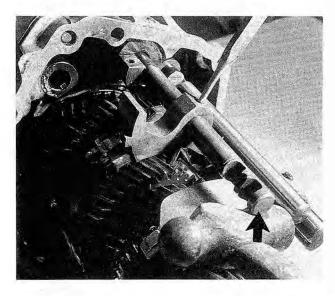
Selector shaft operating lever rolled pin being driven in. Support end of shaft (arrow) while driving pin.
